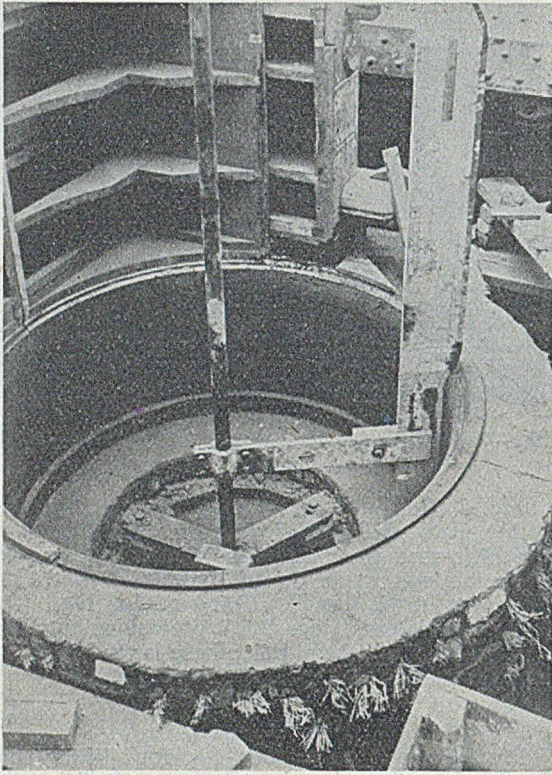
Second Joint with the Main Door, Steam Box and Cleading Flange in position.
